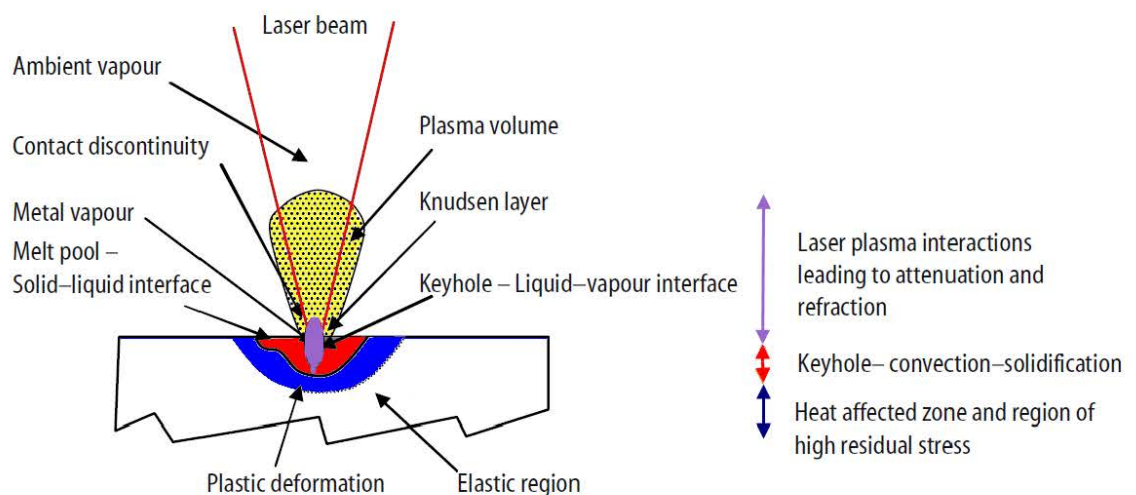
Physical interactions that occur during laser welding.
